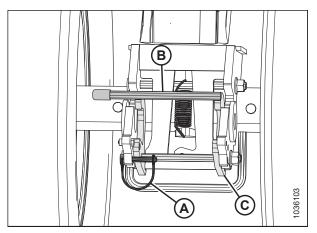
Left Transport Wheels – Rotation Lock Latch Disengaged
